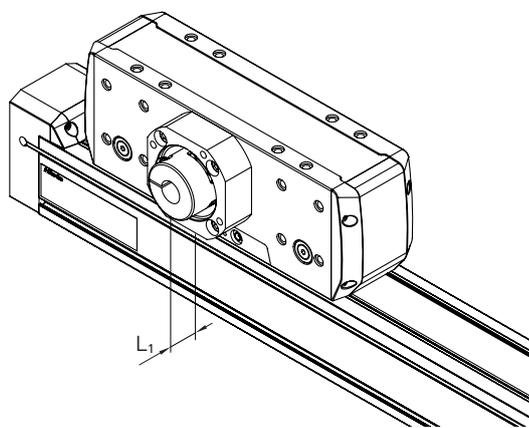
Adjusting the clamping hub distance in the direction of the motor
